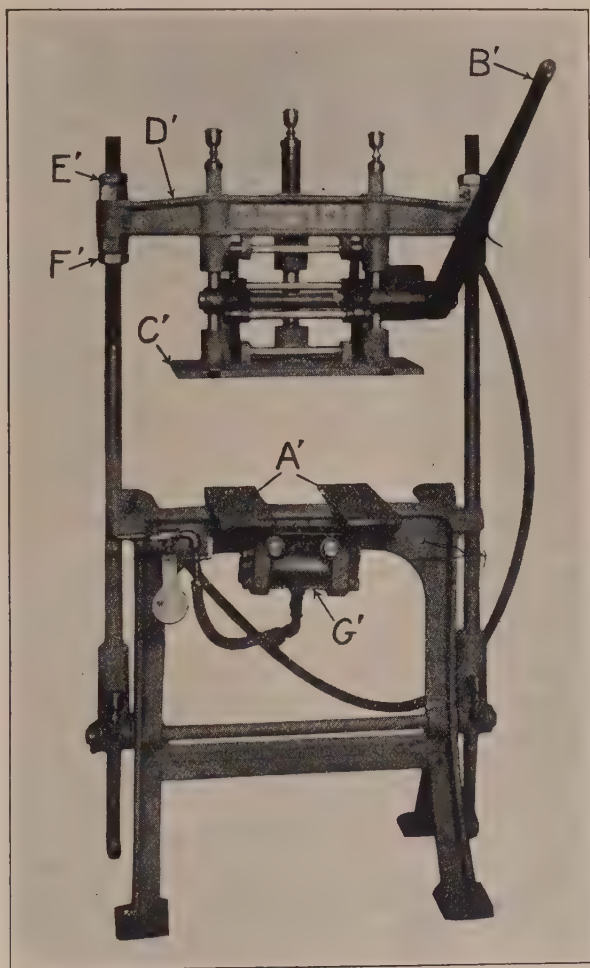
Berkshire's Hand Squeezer and Vibrating Machine.
